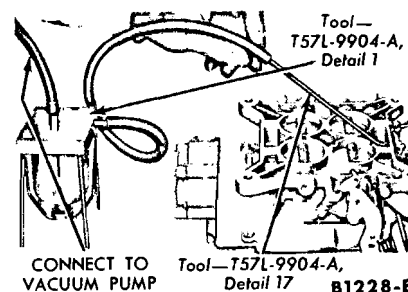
Typical Autolite Carburetor Power Valve Test for Models 2100 and 4100
